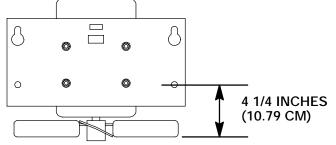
Evaporator Fan Locating Dimension 4.15 SERVICING THE EVAPORATOR COIL HEATERS
